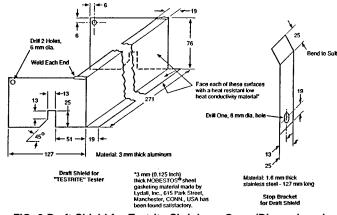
Draft Shield for Testrite Shrinkage Oven (Dimensions in Millimetres Unless Specified)
